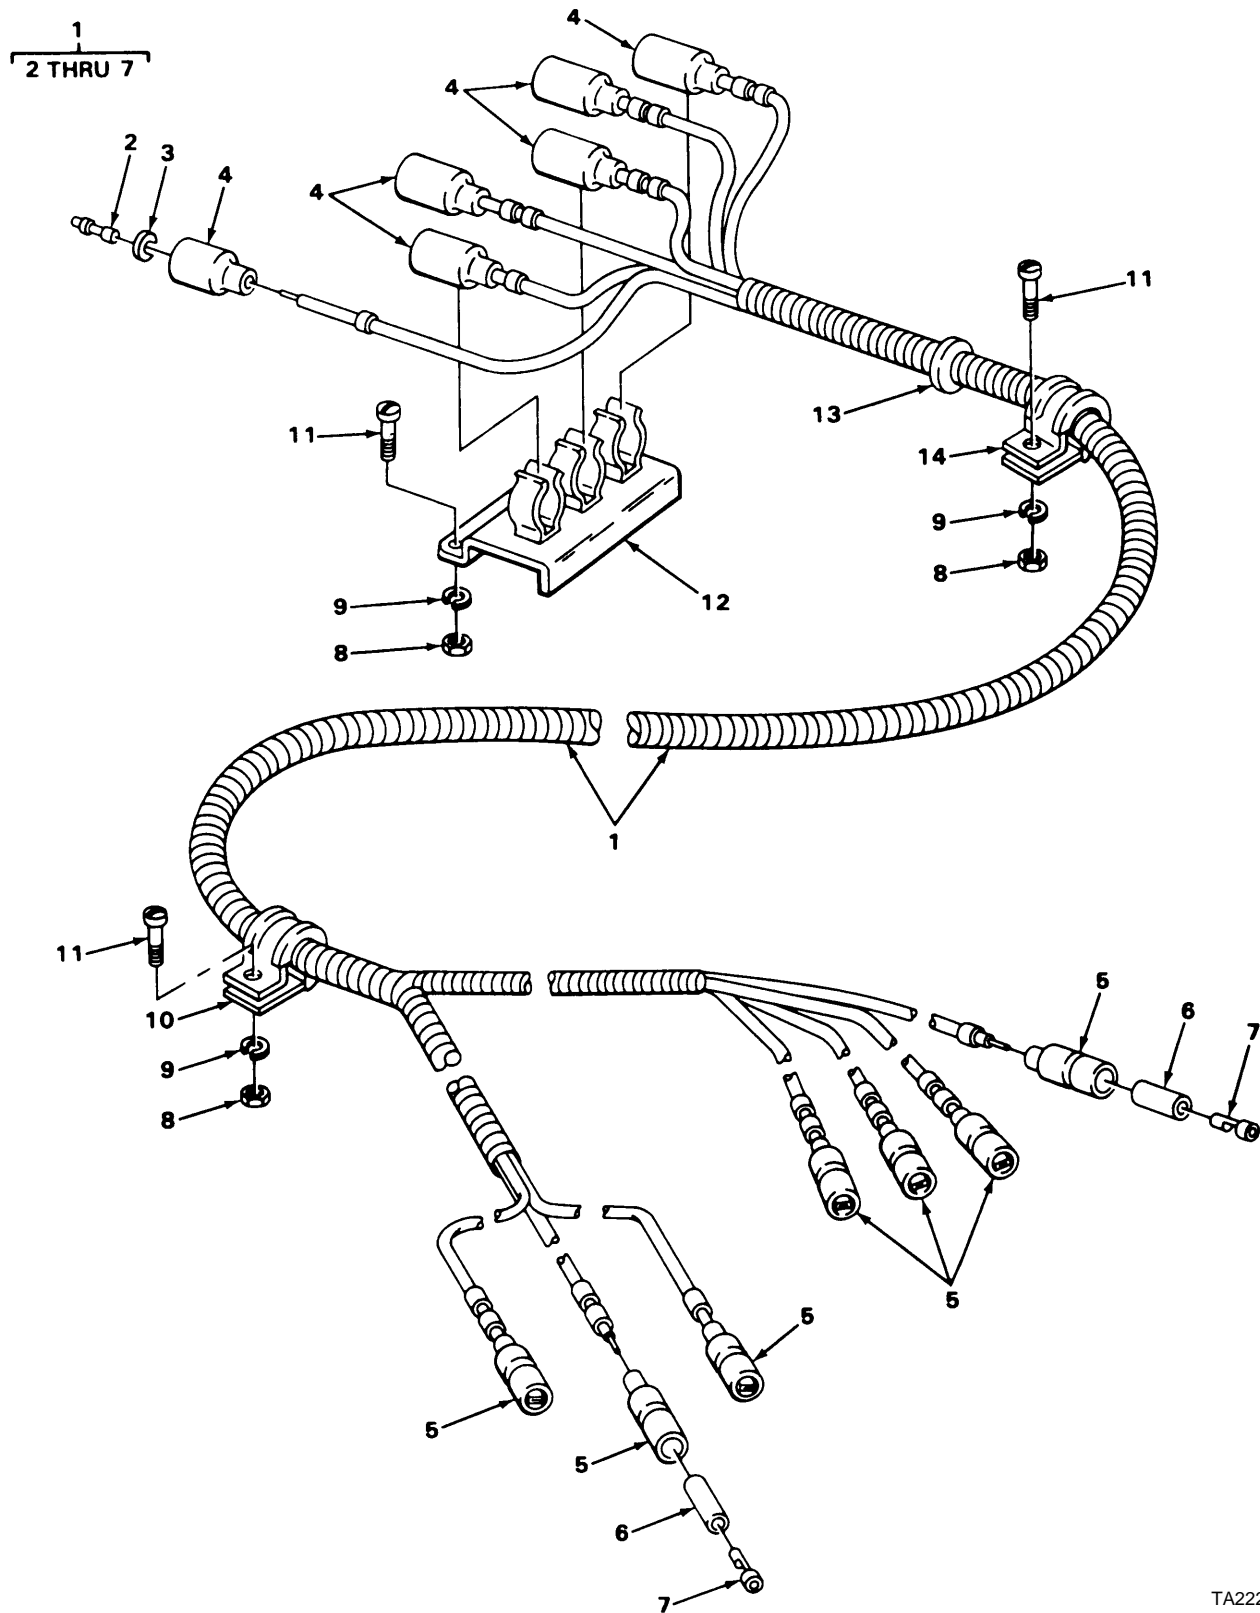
CHASSIS WIRING HARNESS FOR BLACKOUT STOPLIGHT ASSEMBLY.
